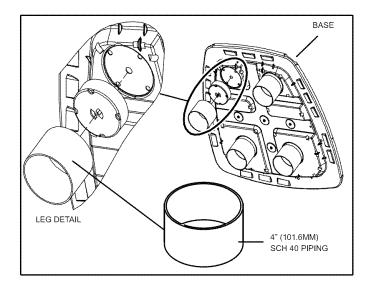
Elevated Slab Mounting using Feet Extenders (Small Base Units)
